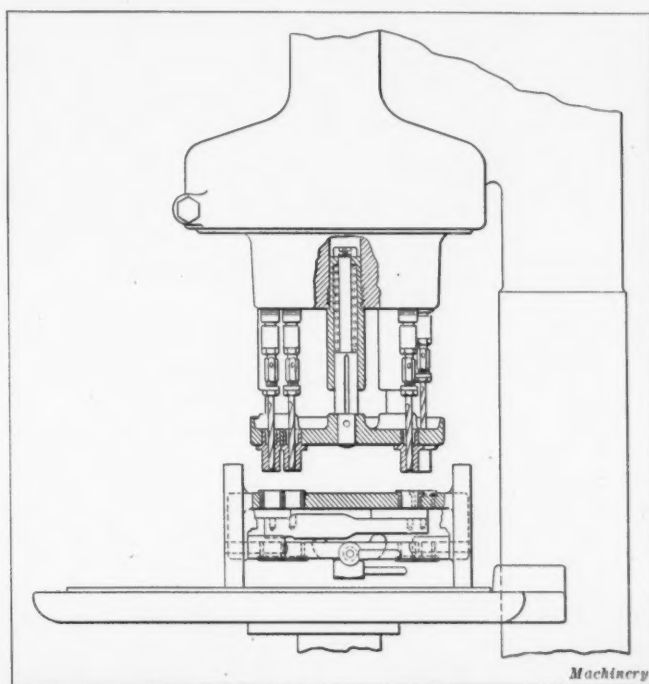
Partial Side Elevation of Drill Head used on Machine at Left in Fig. 23, showing Sub-jig and Jig in Position for First Drilling Operation
